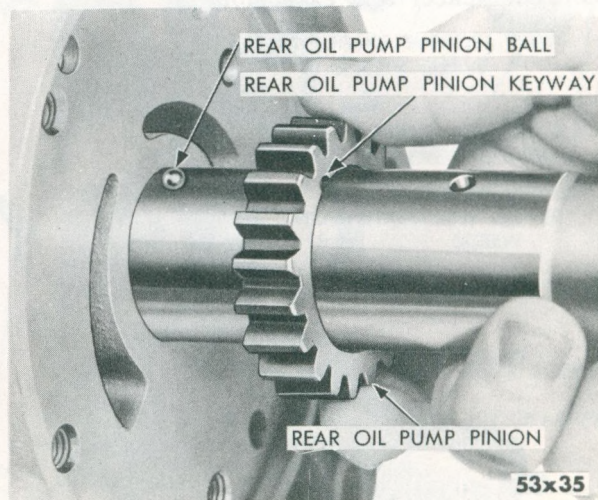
Removal and Installation of Rear Oil Pump Pinion
